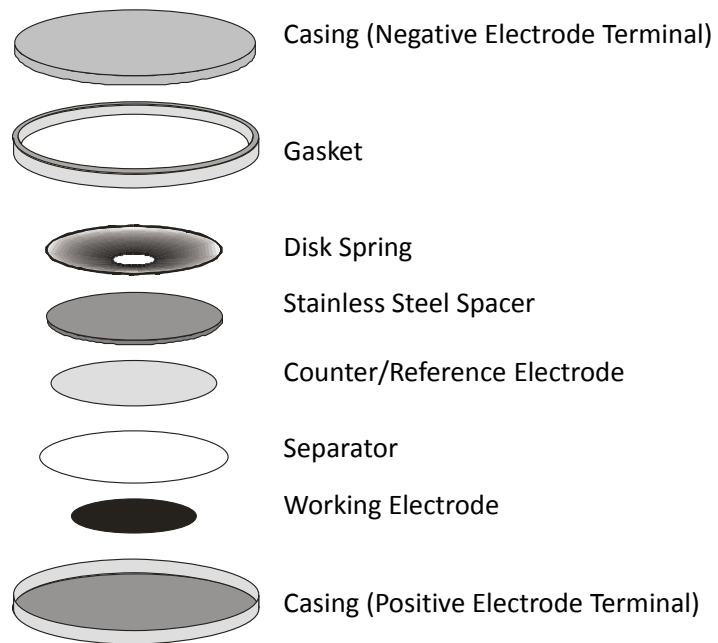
Schematic of coin cell parts and coin cell assembly.
